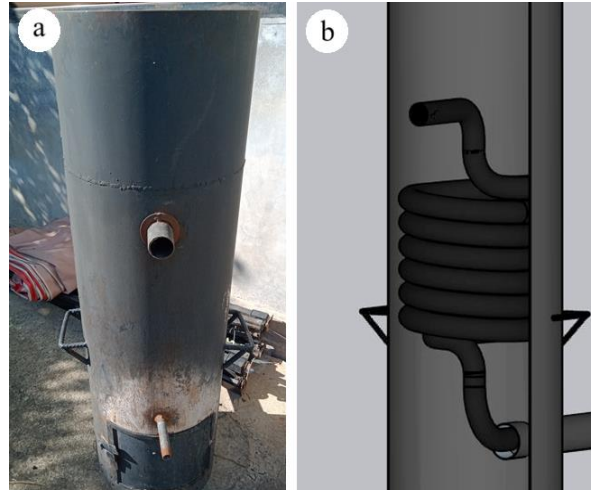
Recuperative heat exchanger (a) The fifth layer of the bloomery shaft furnace, and (b) Recuperator spiral coiled tubes.
